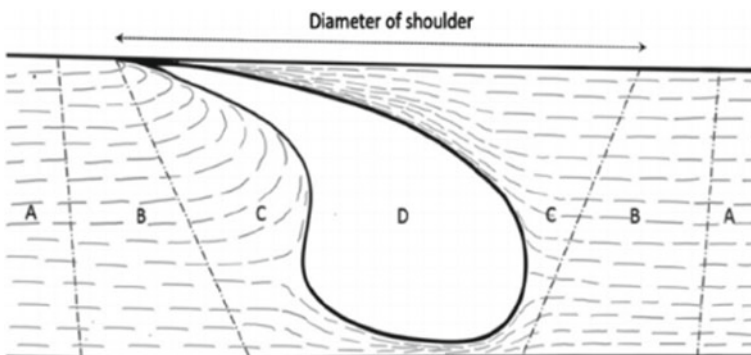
Typical FSW weld region: a base metal, b heat-affected zone, c thermo-mechanically affected zone and d weld nugget zone/stirred zone [3]. ©Springer. Reproduced by permission of Springer. Permission to reuse must be obtained from the rights holder
